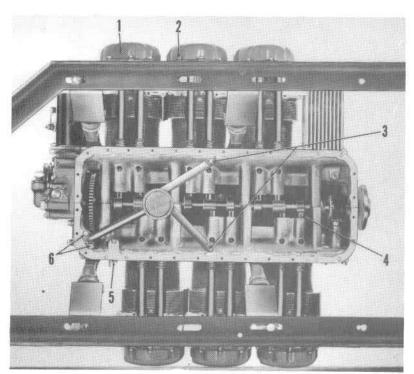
BOTTOM VIEW WITH VALVE MECHANISM AND OIL SUCTION TUBE.
